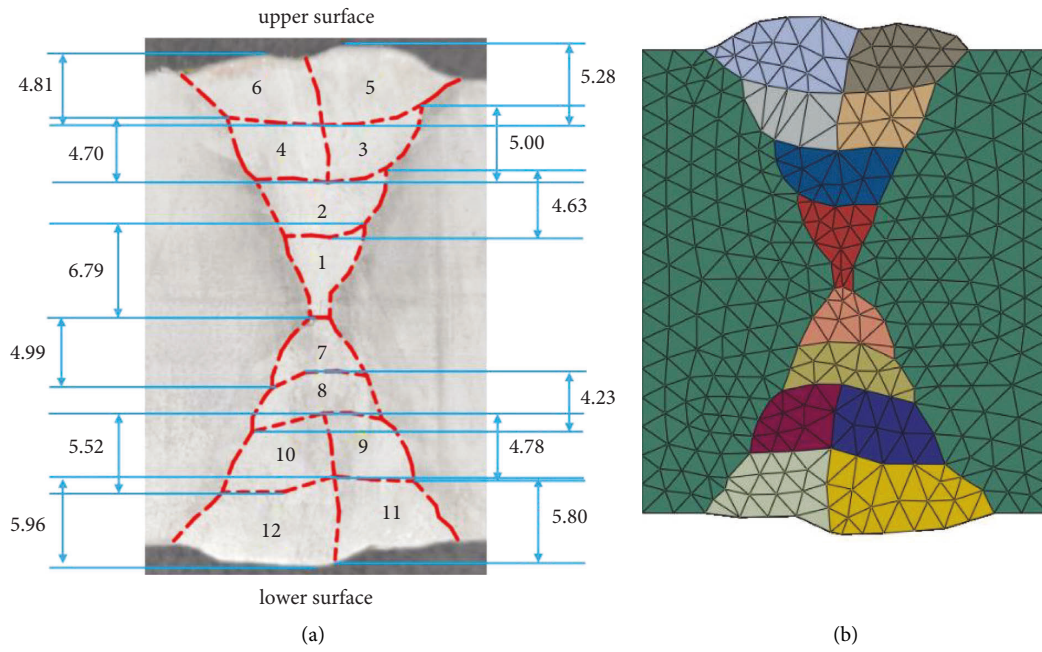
The schematic diagram of each weld layer and welding bead (unit: mm). (a) Actual profile of each weld bead. (b) Profile of each weld bead in the FE model.
